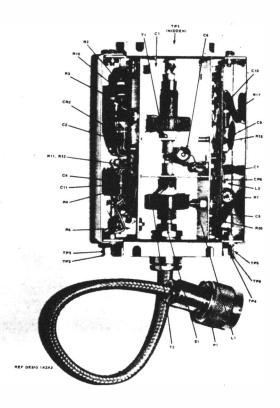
Discriminator Assembly 1A2A2, Component and Test Point Locations
